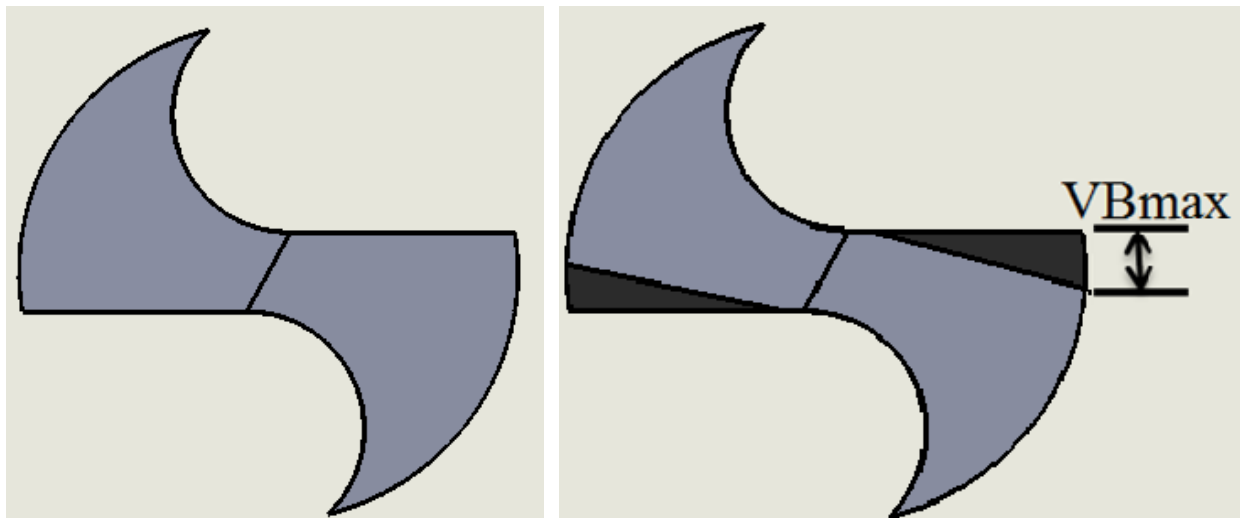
Schematic representation of cutting edge of the drill and flank wear measurement
